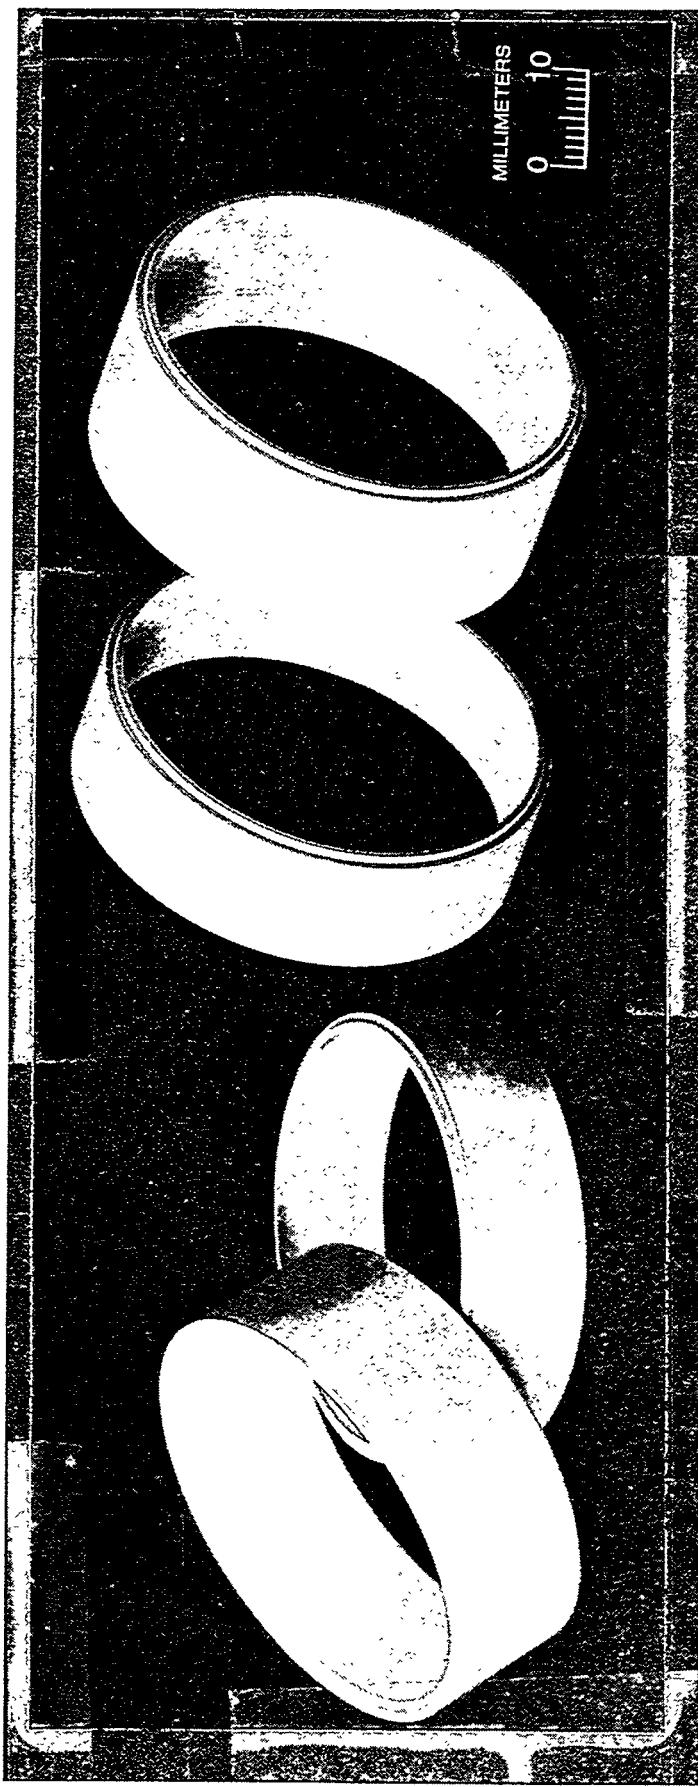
Rings of europium oxide prior to coating with aluminum and assembling into a shield.
